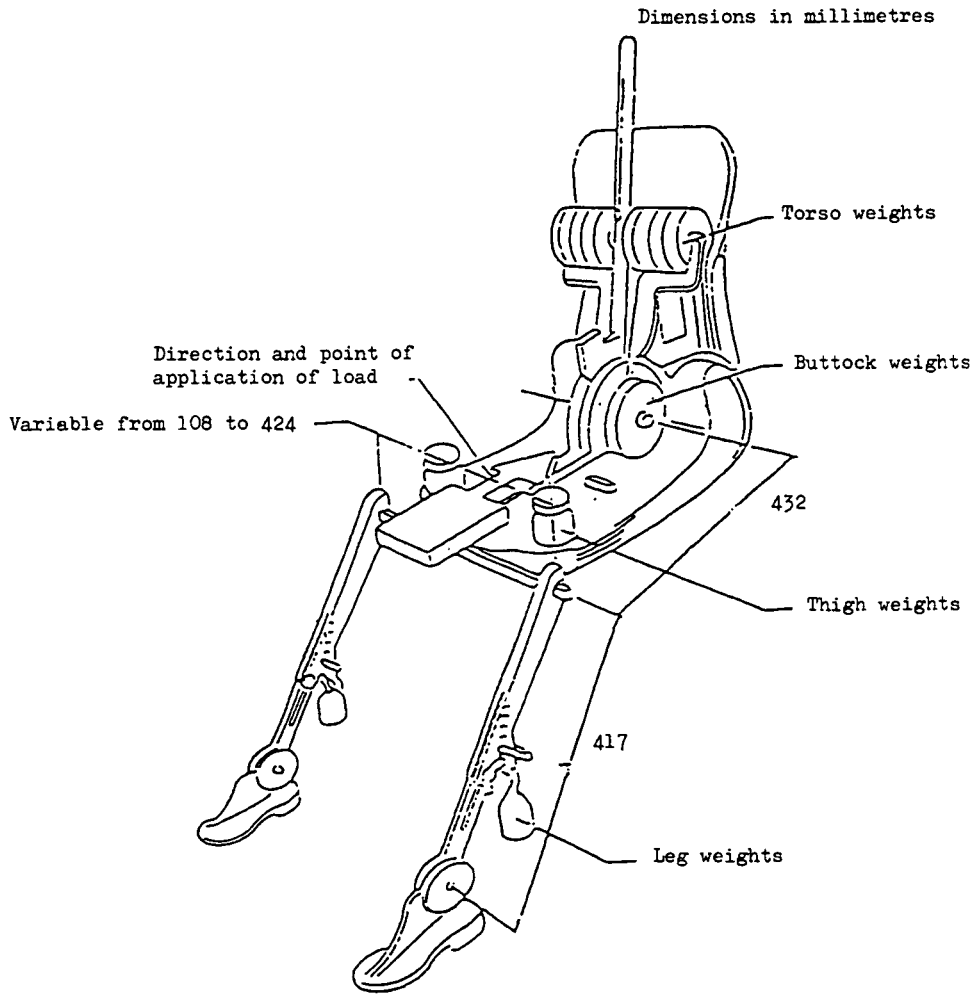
Dimensions of the 3 DH machine elements and load distribution
